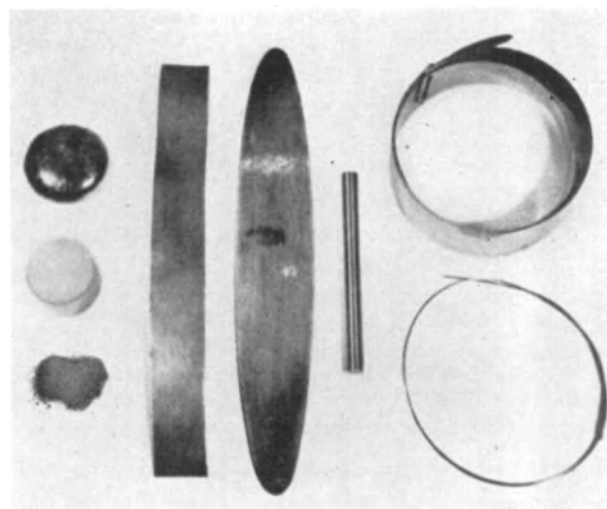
Zr powder, Zr cold press compact, melted ingot, cold-rolled sheet, hot-rolled strip, machined Zr bar, coiled cold-rolled Zr foil 0.008 in. thick, and rolled Zr wire 0.03 in. diameter (Reduced to slightly less than one-half size)
